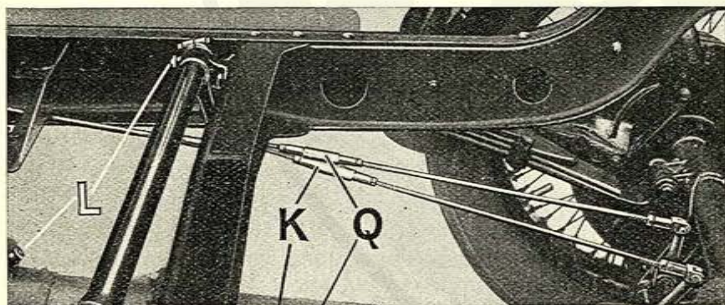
Showing Adjusting Nuts K & Q for Foot and Hand Brakes. Lubricators are marked L.
